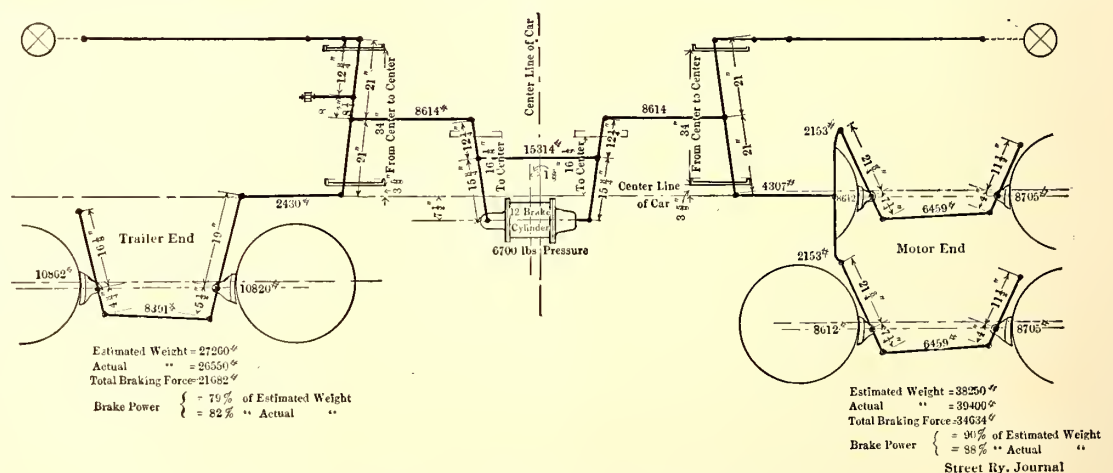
DIAGRAM OF BRAKE RIGGING OF MOTOR CARS
